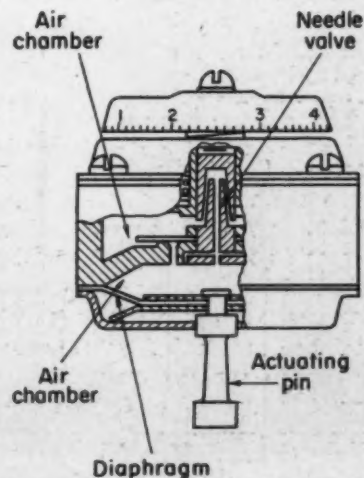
Right—Sectional view of the timing mechanism for the pneumatic timer
